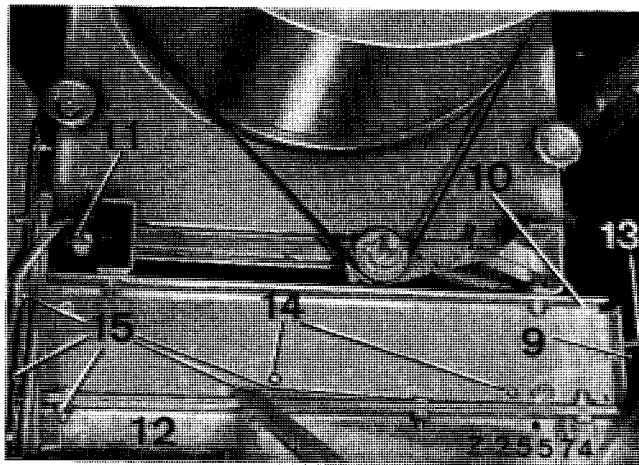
Removing Right-Hand Engine Mounting Bracket
